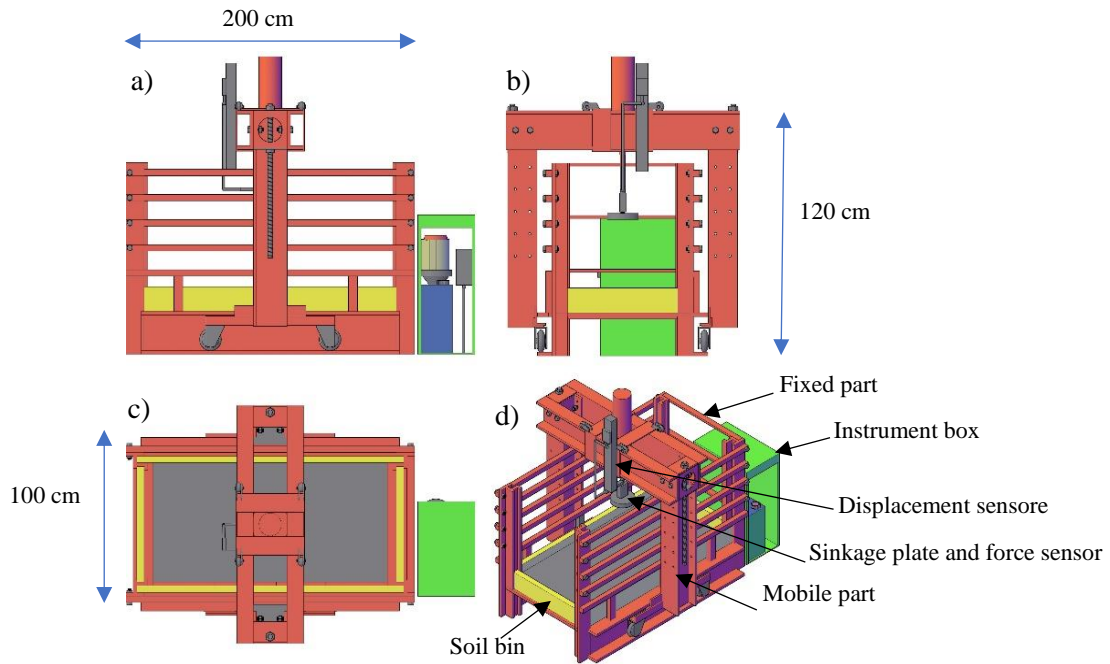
The assembled parts of bevameter device including the mechanical structure, the soil bin and instrument box: a) Front view, b) Side view, c) Top view and d) Isometric view
